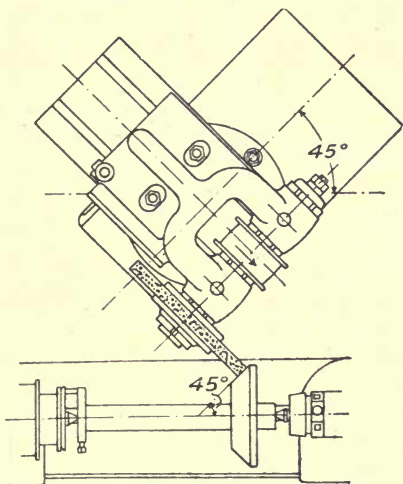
GRINDING ANGULAR FACE WITH WHEEL SLIDE SWIVELLED
